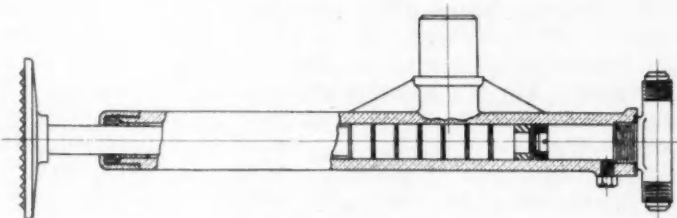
PEDAL USED ON PIERCE-ARROW EQUIPMENT IN CONNECTION WITH A HYDRAULIC BRAKE
